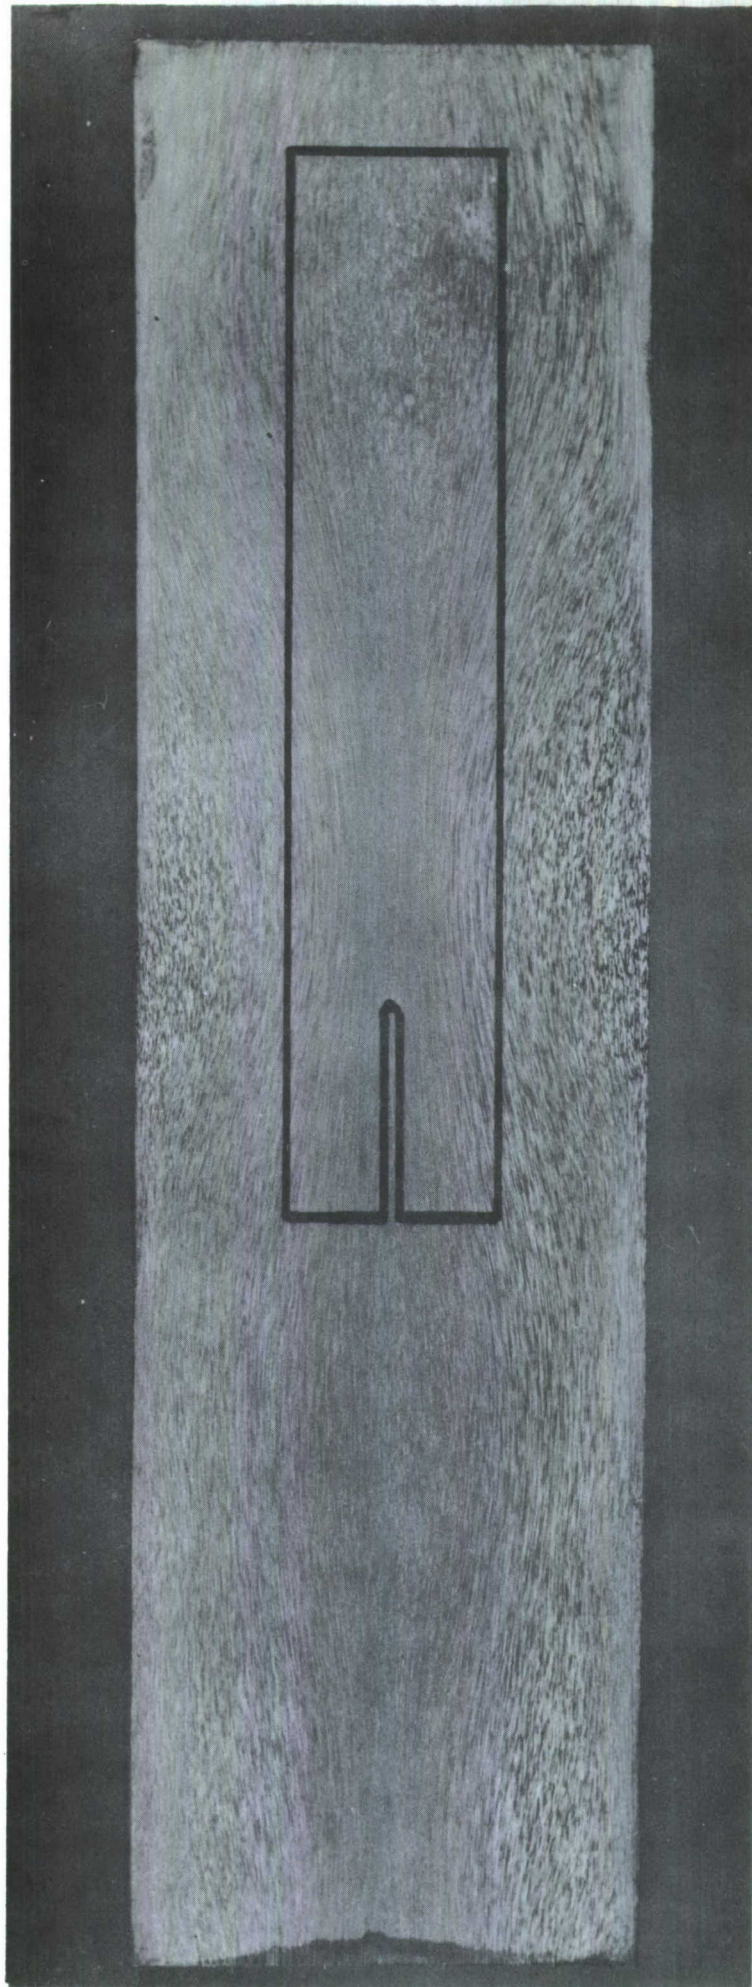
Configuration of DCB specimen used for plate and hand forgings in Contract No. F-33615-71-C-1571. Specimens from die forgings were the same except height (dimension perpendicular to slot) was 9/16 in.
